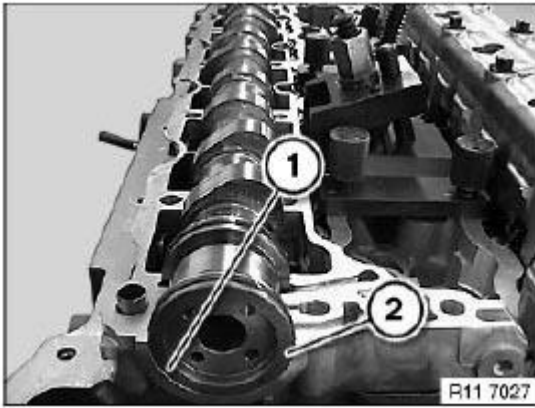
Identifying Installation Position Of Exhaust Camshaft At Cylinder No. 1
